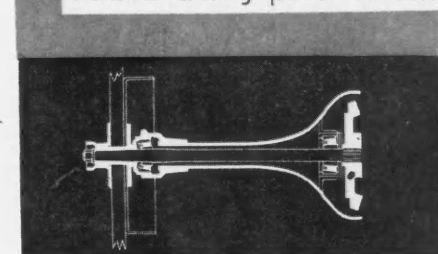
In a semi-floating axle the rear wheel is attached solely to the end of an axle shaft which projects beyond bearing at housing end
